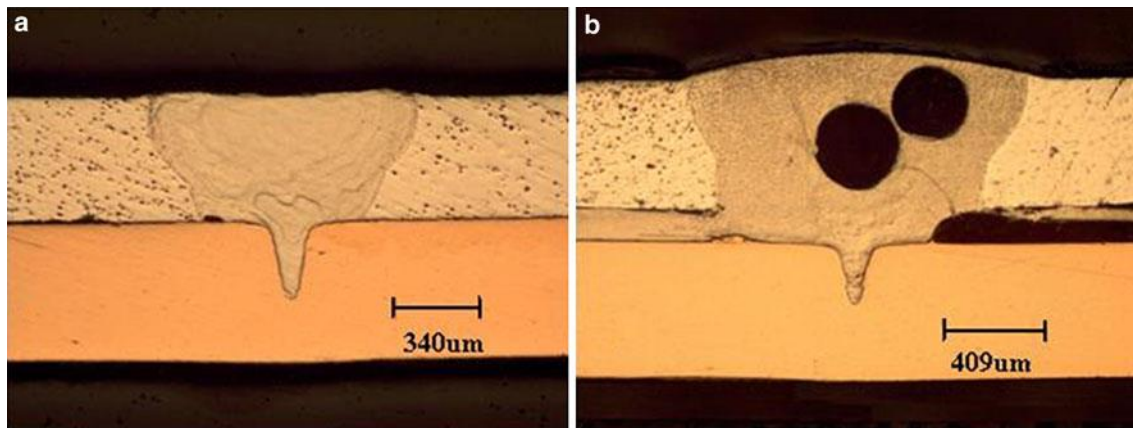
Al-Cu laser weld (a) without Sn filler metal (b) with Sn filler metal [106].
